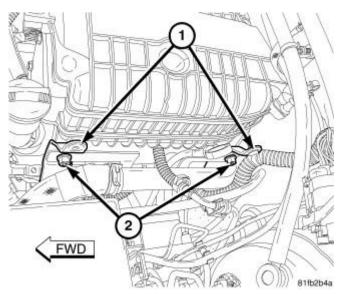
Manifold Support Brackets & Nuts Courtesy of CHRYSLER LLC
